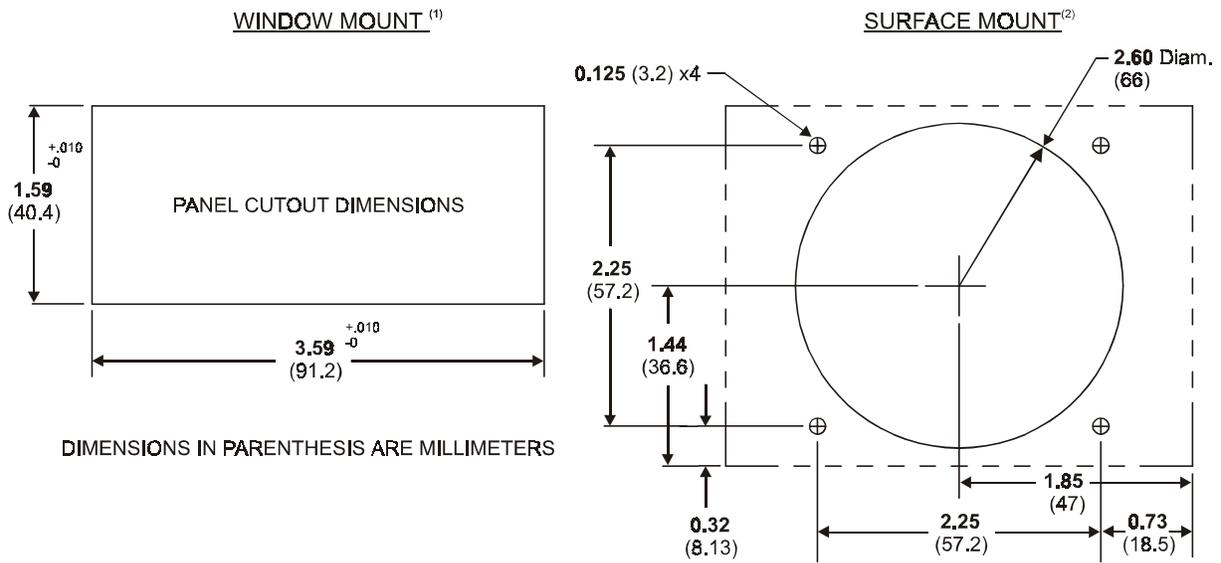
REMOTE METER MOUNTING DIMENSIONS
